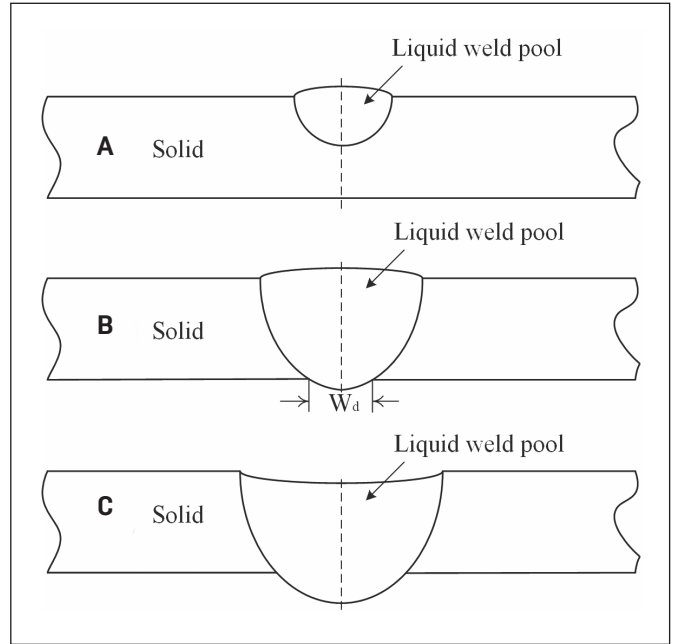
Weld pool evolution: A — Incomplete joint penetration; B — complete joint penetration; C — excessive penetration.
